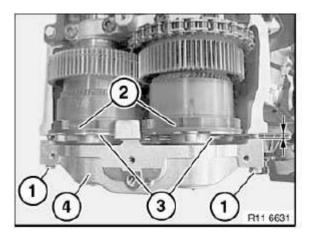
Identifying VANOS Adjustment Unit, Thrust Bearing Plates And VANOS Gears Courtesy of BMW OF NORTH AMERICA, INC.
